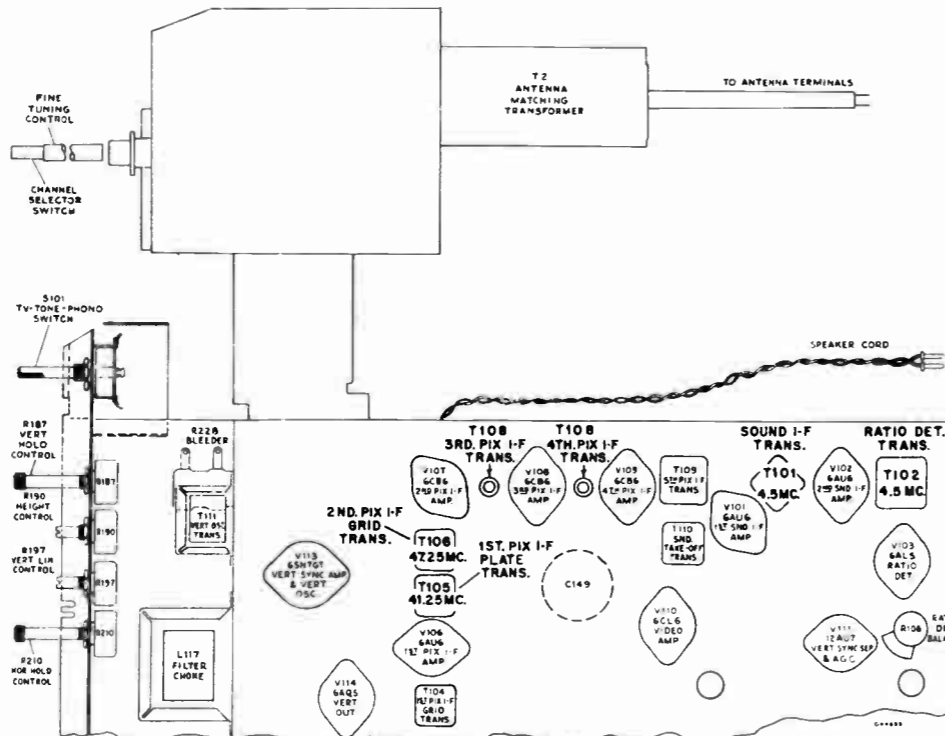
Bottom Chassis Adjustments (KRK11B Tuner Shown)
